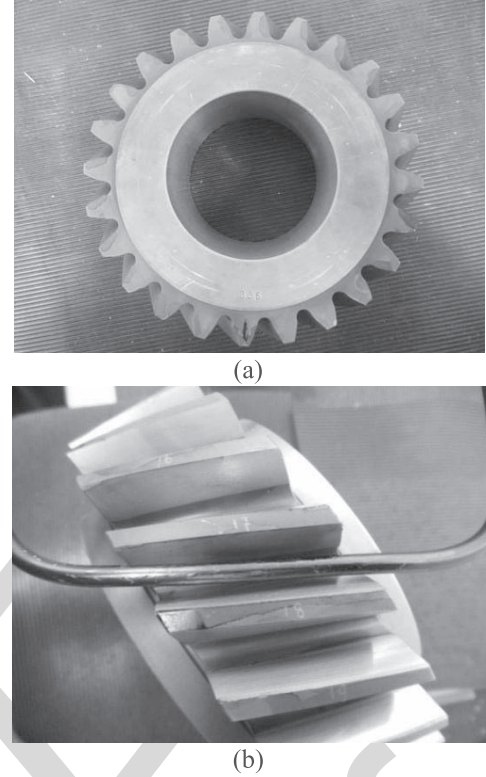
(a) The Gear sample. (b) Fatigue test gear with inductor coil.
